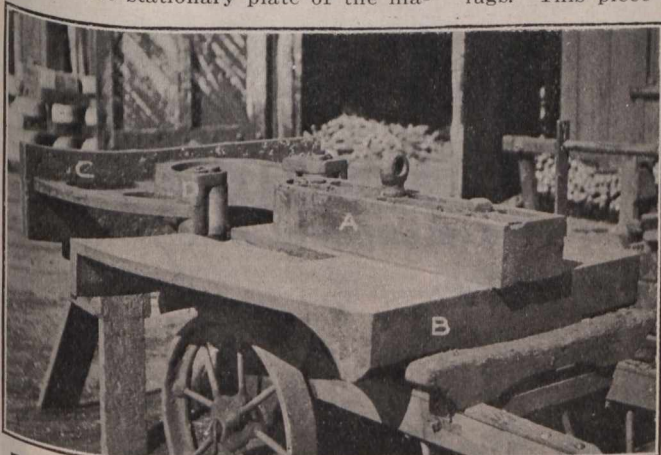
Final Operation of Bending Car-coupler Pocket to a U-shape.
